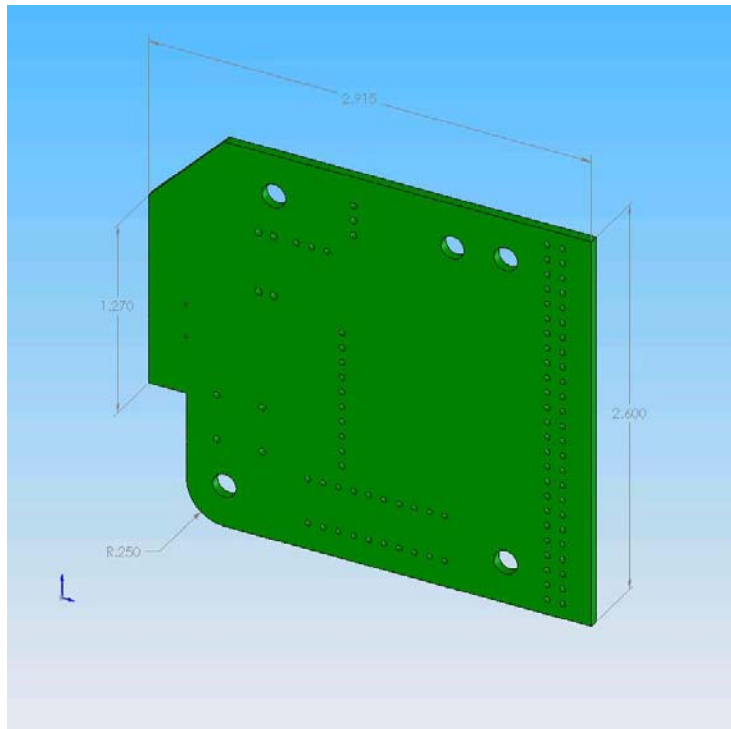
PCAD PCB Outline with silkscreen and top layer pads.
